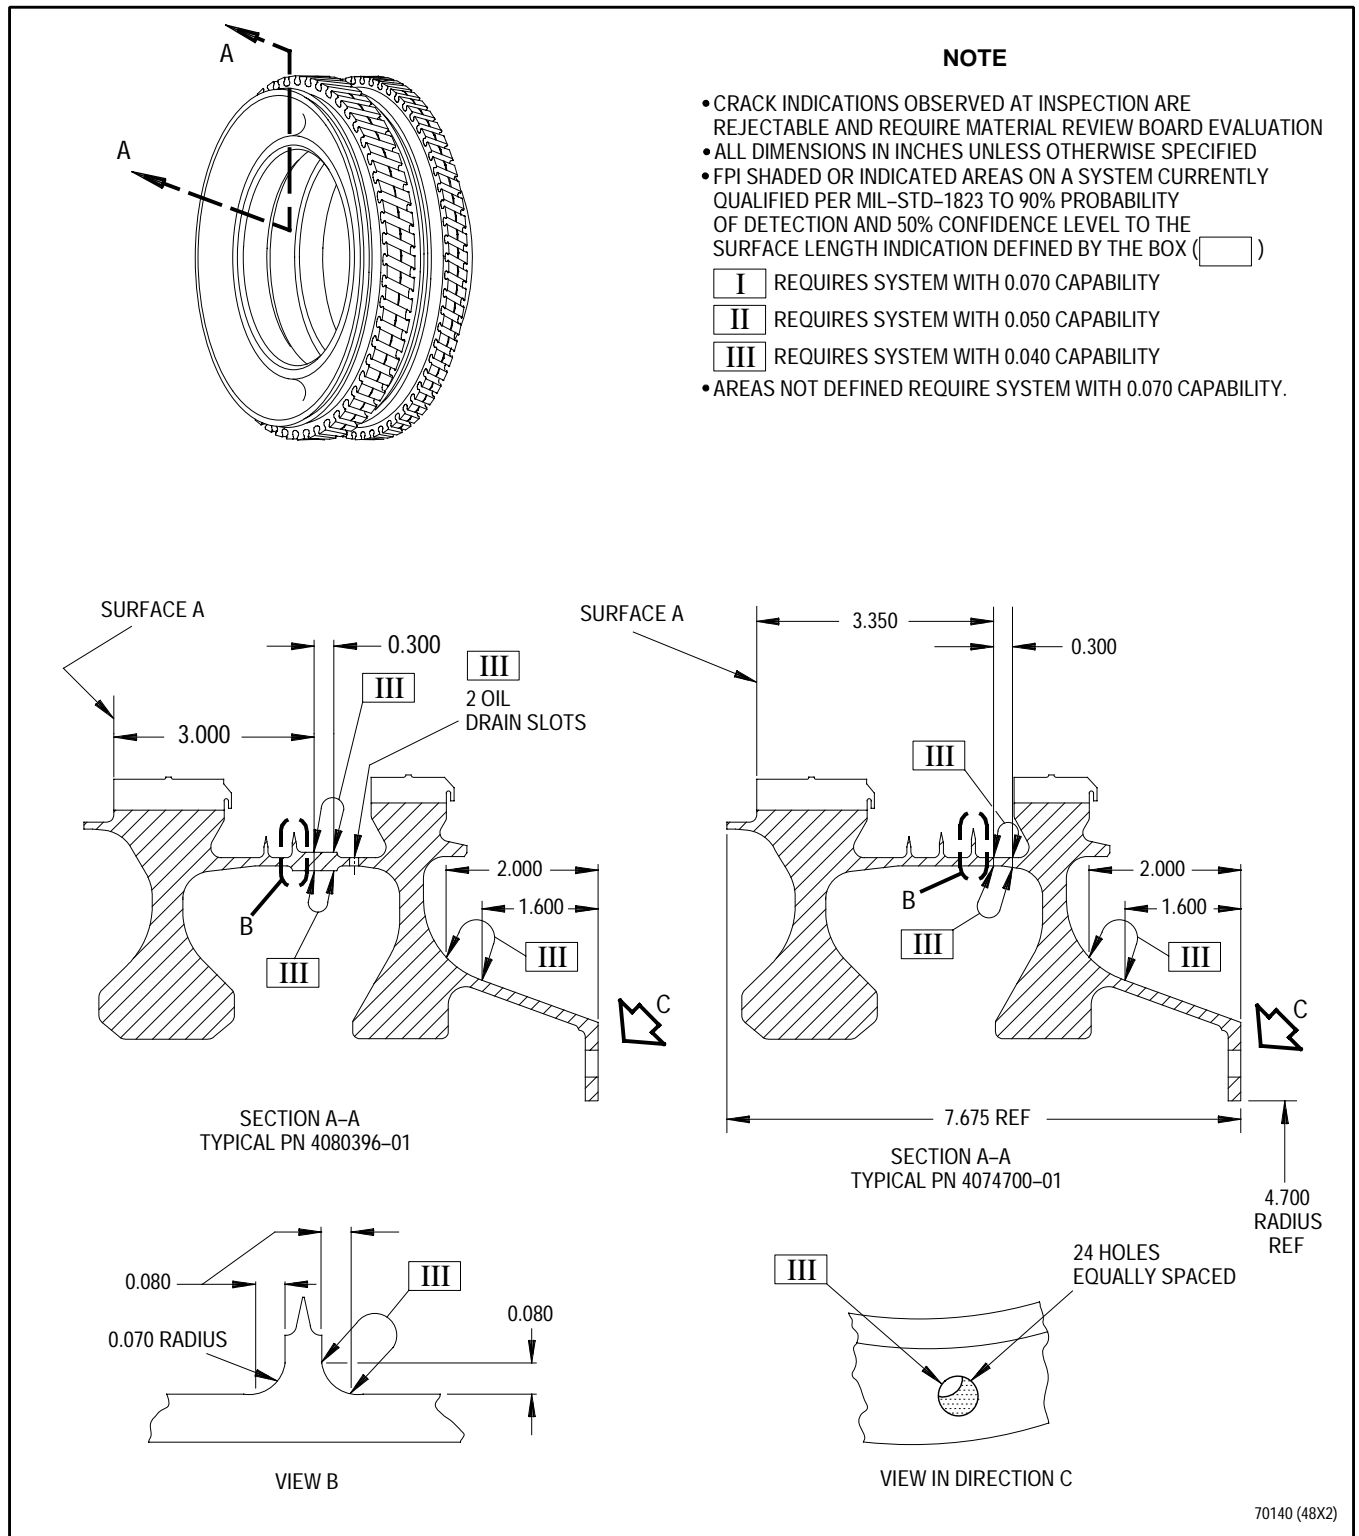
A. Fourth and Fifth Stage Rear Compressor Front Disk-Drum Rotor Assembly - Required Fluorescent Penetrant System Capability
